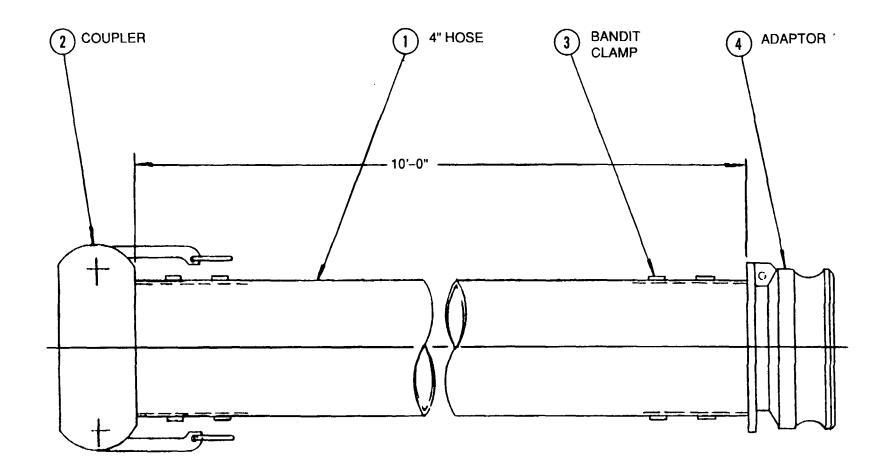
HOSE ASSEMBLY (MODEL 5,000 gallon)
